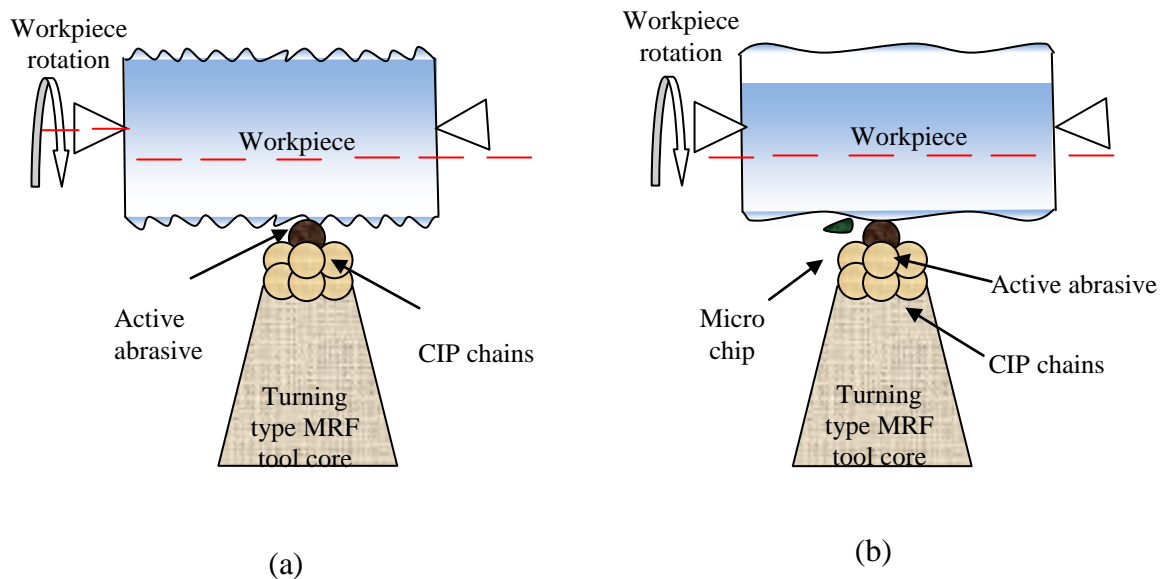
Schematic diagram of mechanism of material removal (a) initial surface roughness peaks of workpiece and gripped abrasive with CIPs (b) Chip removal in finishing
